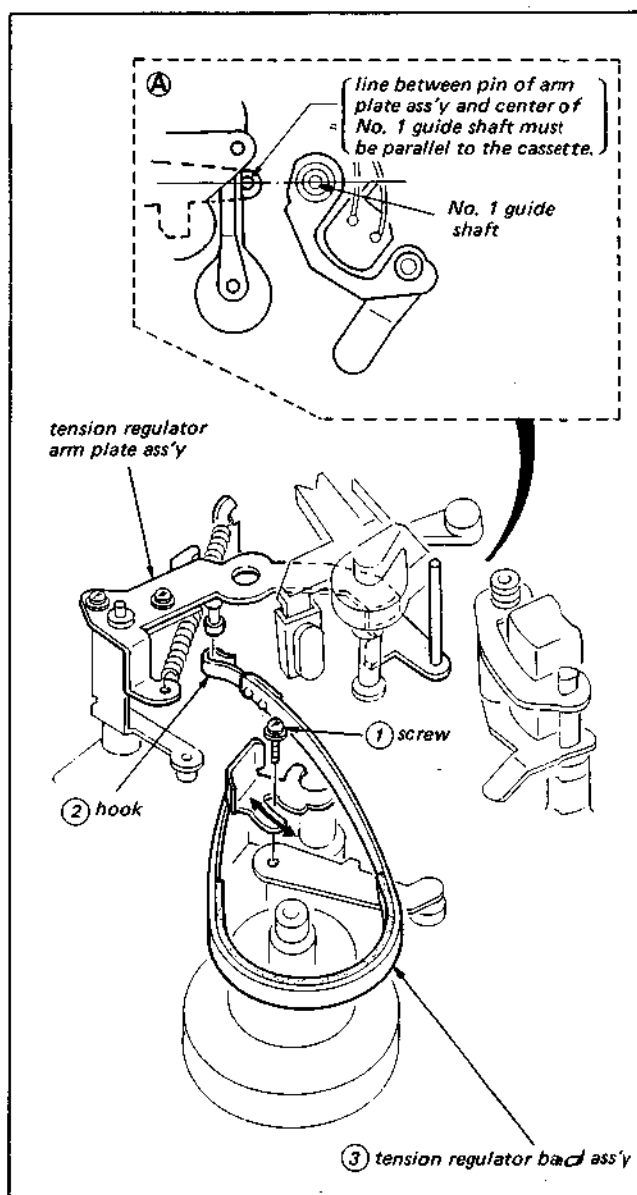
Replacement and adjustment of the tension regulator band assembly
